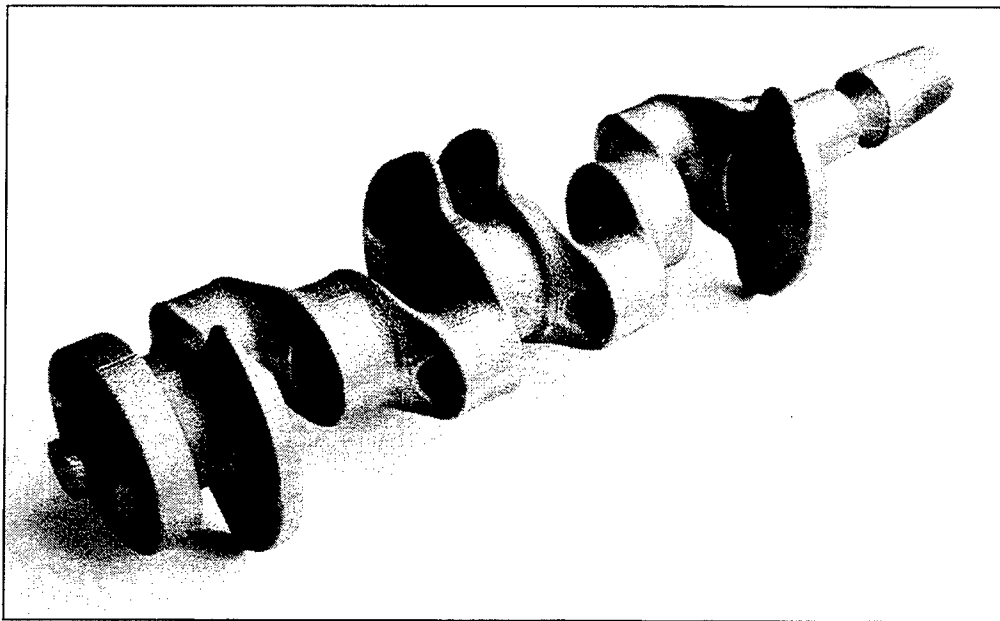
Crankshaft with 9 hollow bearingseats, casted in a two-part mould
